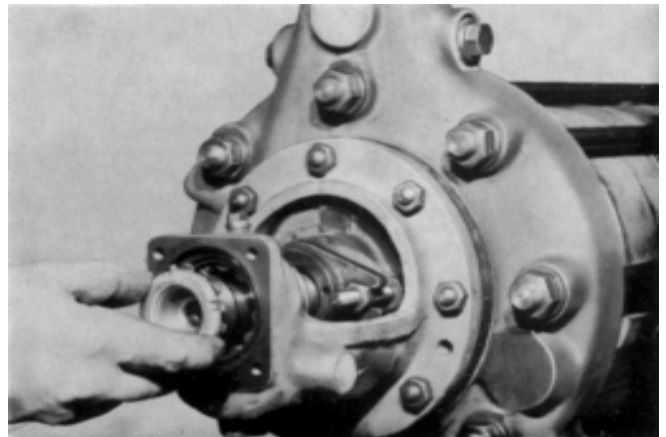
Mounting the inner race of the cylindrical roller bearing with adaptor sleeve.
